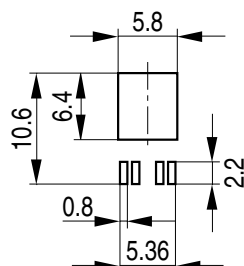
Foot Print for PG-TO-252-5-11 (Plastic Transistor Single Outline)
